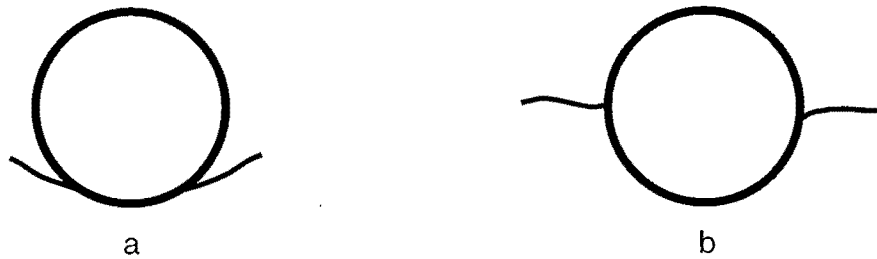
a) Sketch showing an eyebrow type crack b) Sketch showing a centerline type crack
